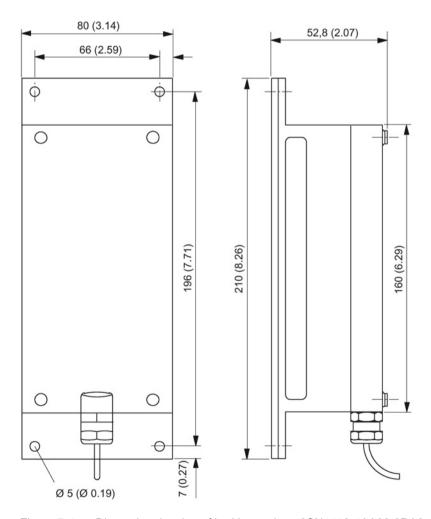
Dimension drawing of braking resistor 6SN1113-1AA00-0DA0 where  $P_n/P_{max} = 0.3 \text{ kW}/25 \text{ kW}$ , all dimensions in mm and (inches)
